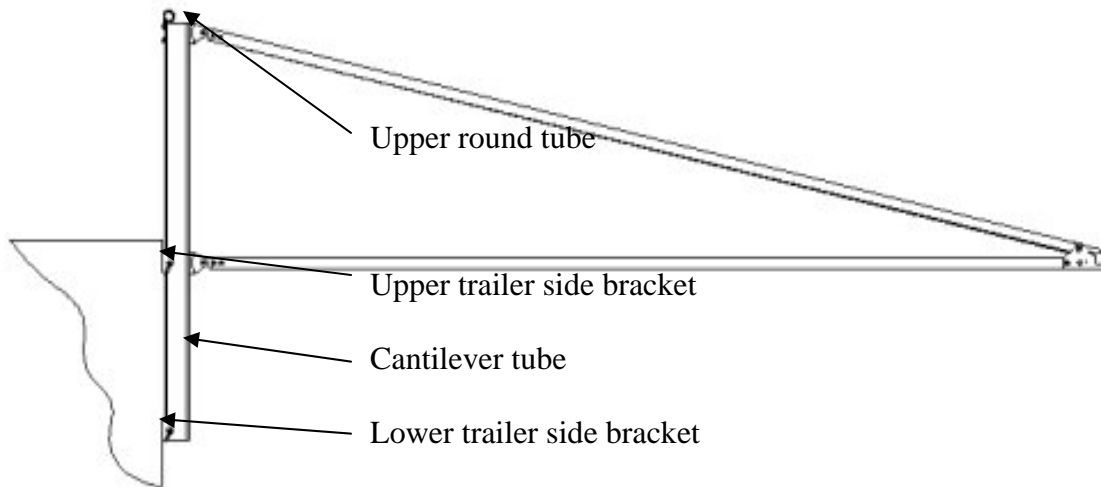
Typical cantilever frame assembly as mounted to trailer
